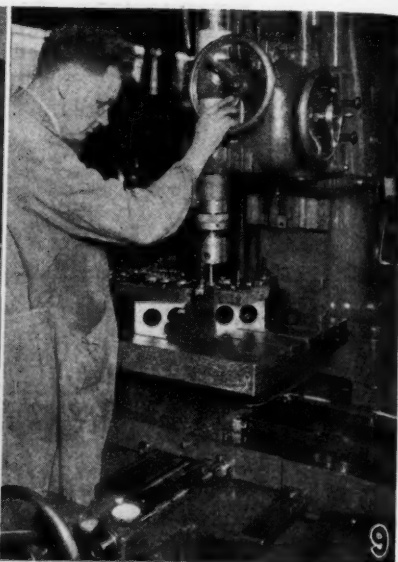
Boring 106 holes in a jig for a radio cabinet, using a P. & W. jig-boring machine.
